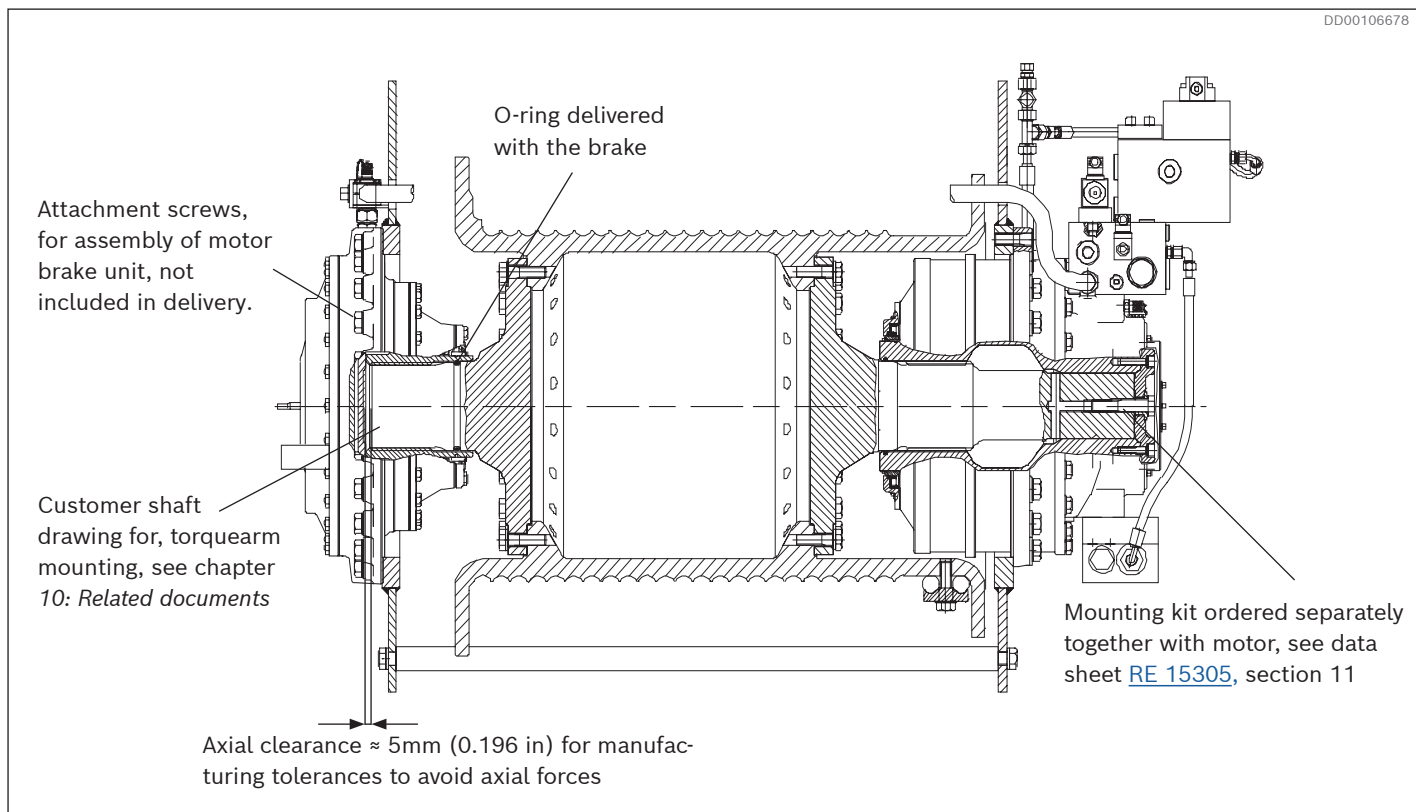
Example flange mounted CA motor with spline and MDA brake on customer shaft
